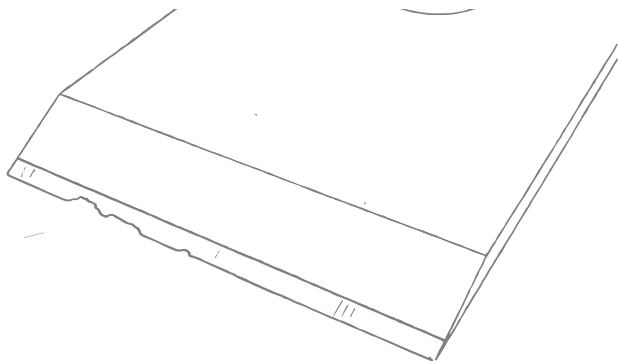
Nicks can be caused by hitting a knot or even driving a chisel too hard with a mallet.
